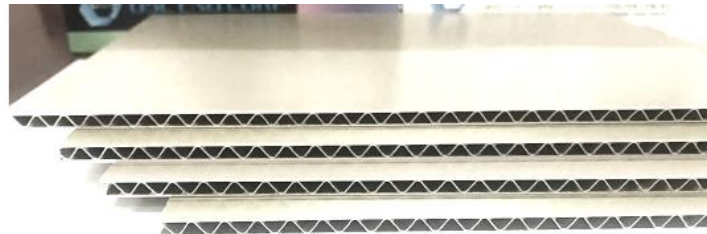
A6063 aluminum corrugated-core sandwich panel
